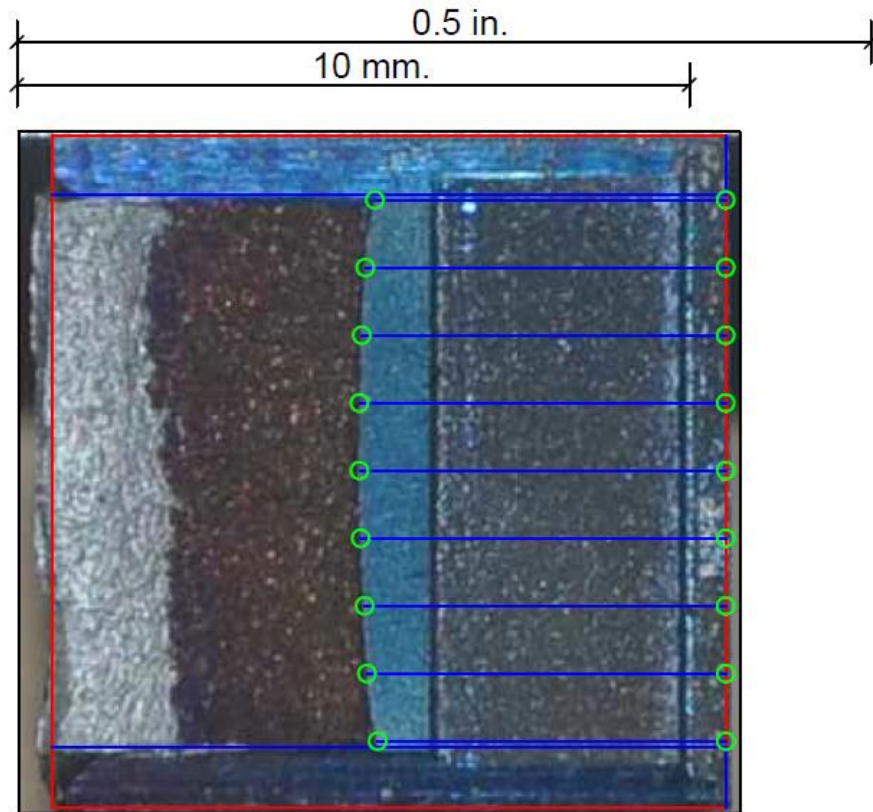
Specimen F7' Fracture Surface
